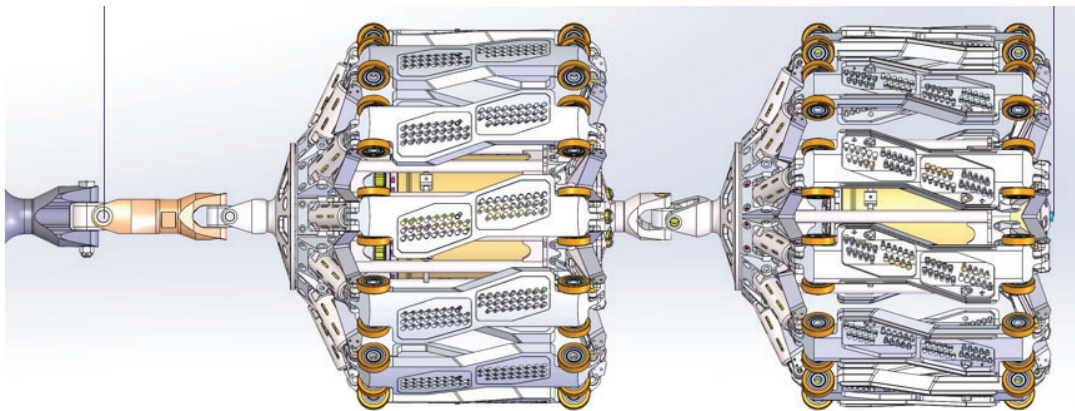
Initial tool design with electronics modules inside sensor carrier frame and long sensor holders.
